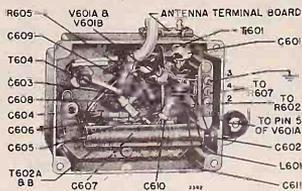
Bottom View of FM Tuner Sub-chassis. Location of components shown.
